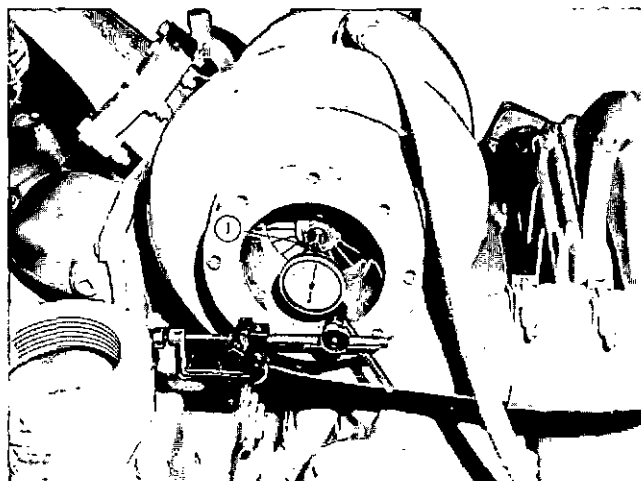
, V41024. Checking turbocharger bearing clearance
